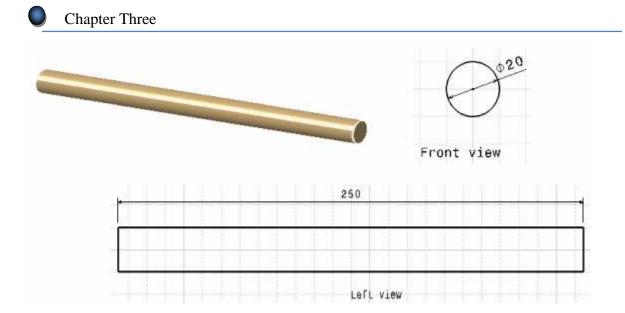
The connecting Shaft (all dimensions are in mm)
